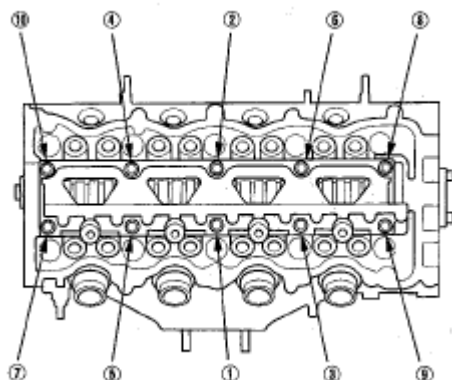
Identifying Tightening Sequence Of Cylinder Head Bolts
